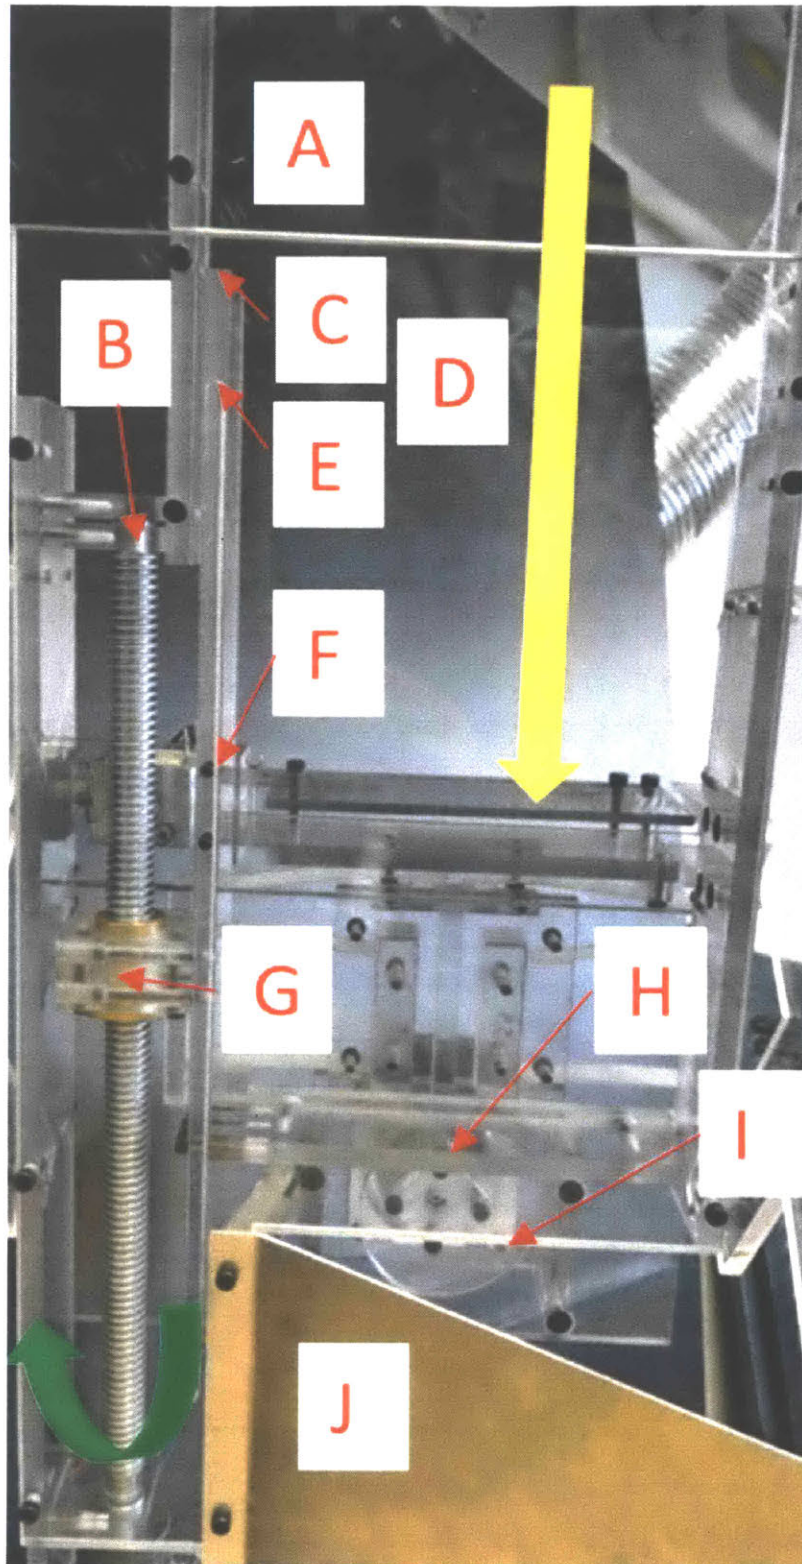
Bottom side view of tray transport system. A) Tray queue section. B) Front of lead screw. C) Front tip of tray slider. D) Start of chassis section. E) Front end of guide
